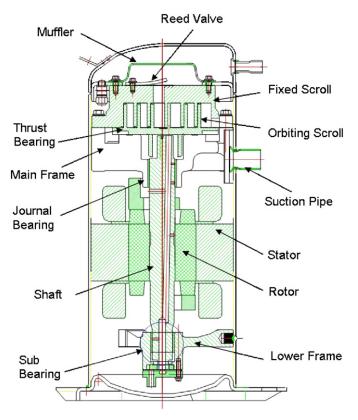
Cross-sectional view of a low-pressure type scroll compressor.
